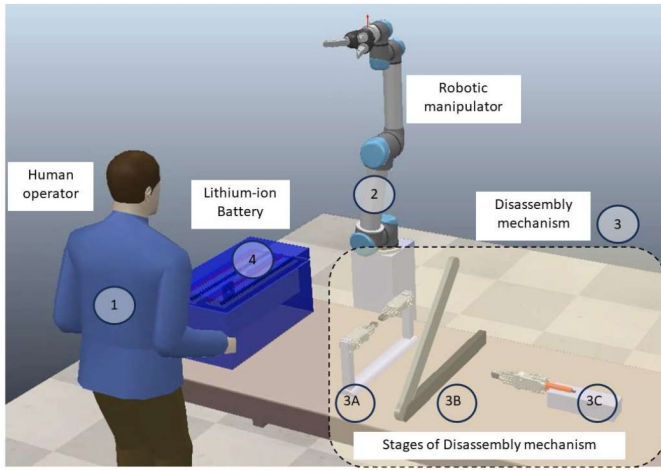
Overall layout of semi-autonomous disassembly system, showing the four sub-entities involved: human operator (1), robotic manipulator (2), a disassembly mechanism (3), and the LIB to be disassembled (4)
